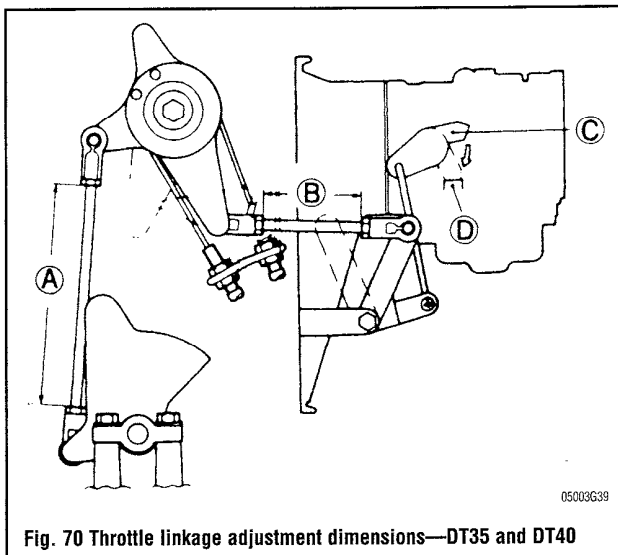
Throttle linkage adjustment dimensions—DT35 and DT40
